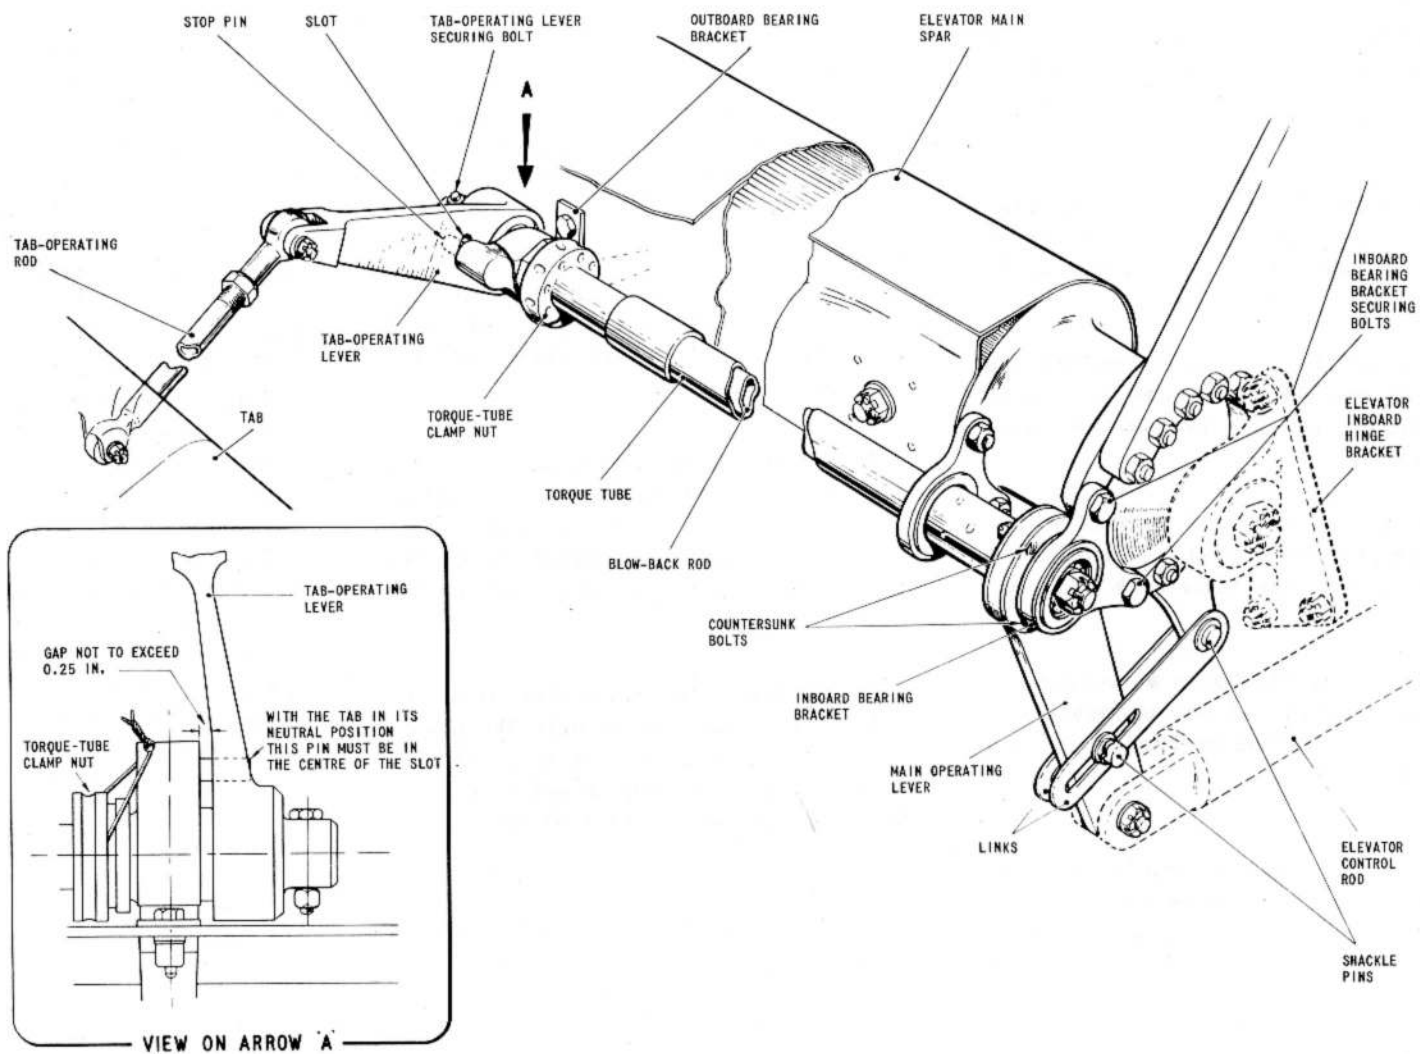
PORT ELEVATOR SPRING TAB MECHANISM REMOVAL
